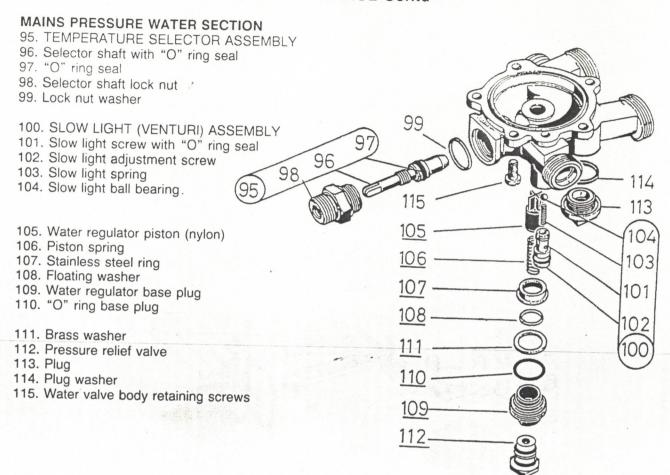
EXPLODED VIEW OF MAINS PRESSURE WATER SECTION
